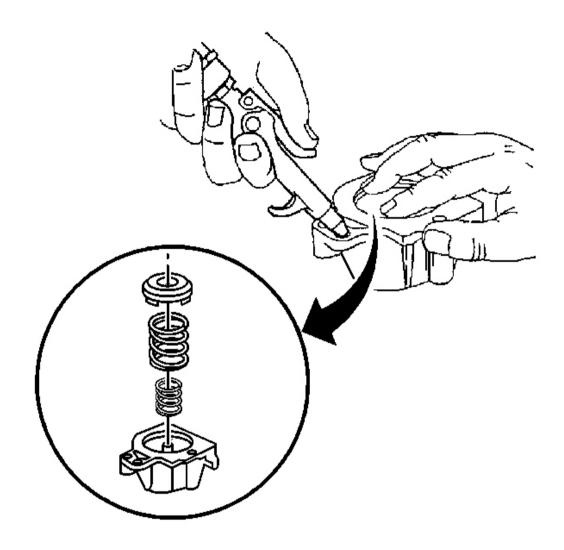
Inspecting The 1-2 Accumulator Inner & Outer Springs For Cracks Courtesy of GENERAL MOTORS CORP.
